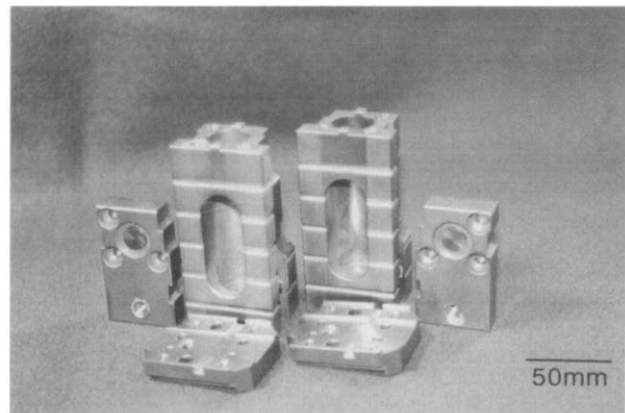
External appearance of a machinery part made from $\text{Al}_{88.5}\text{Ni}_8\text{Mm}_{3.5}$ powders. The machinery part was produced by extrusion, forging and mechanical polishing.
